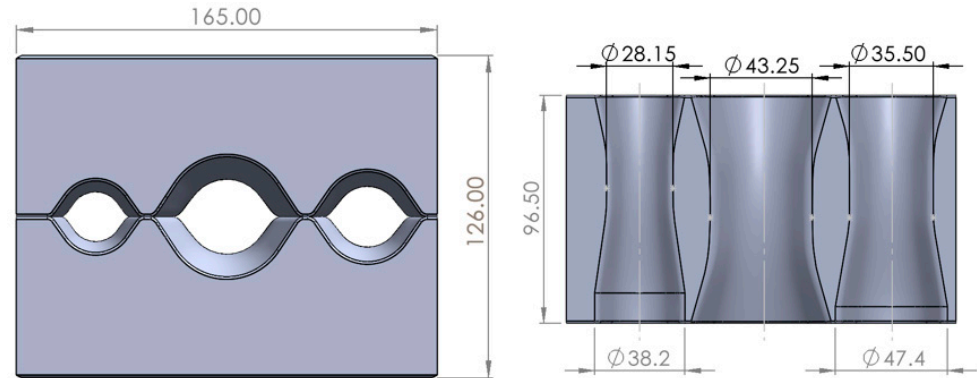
(Left): CAD model of forging dies. (Right): top view of the bottom die.
